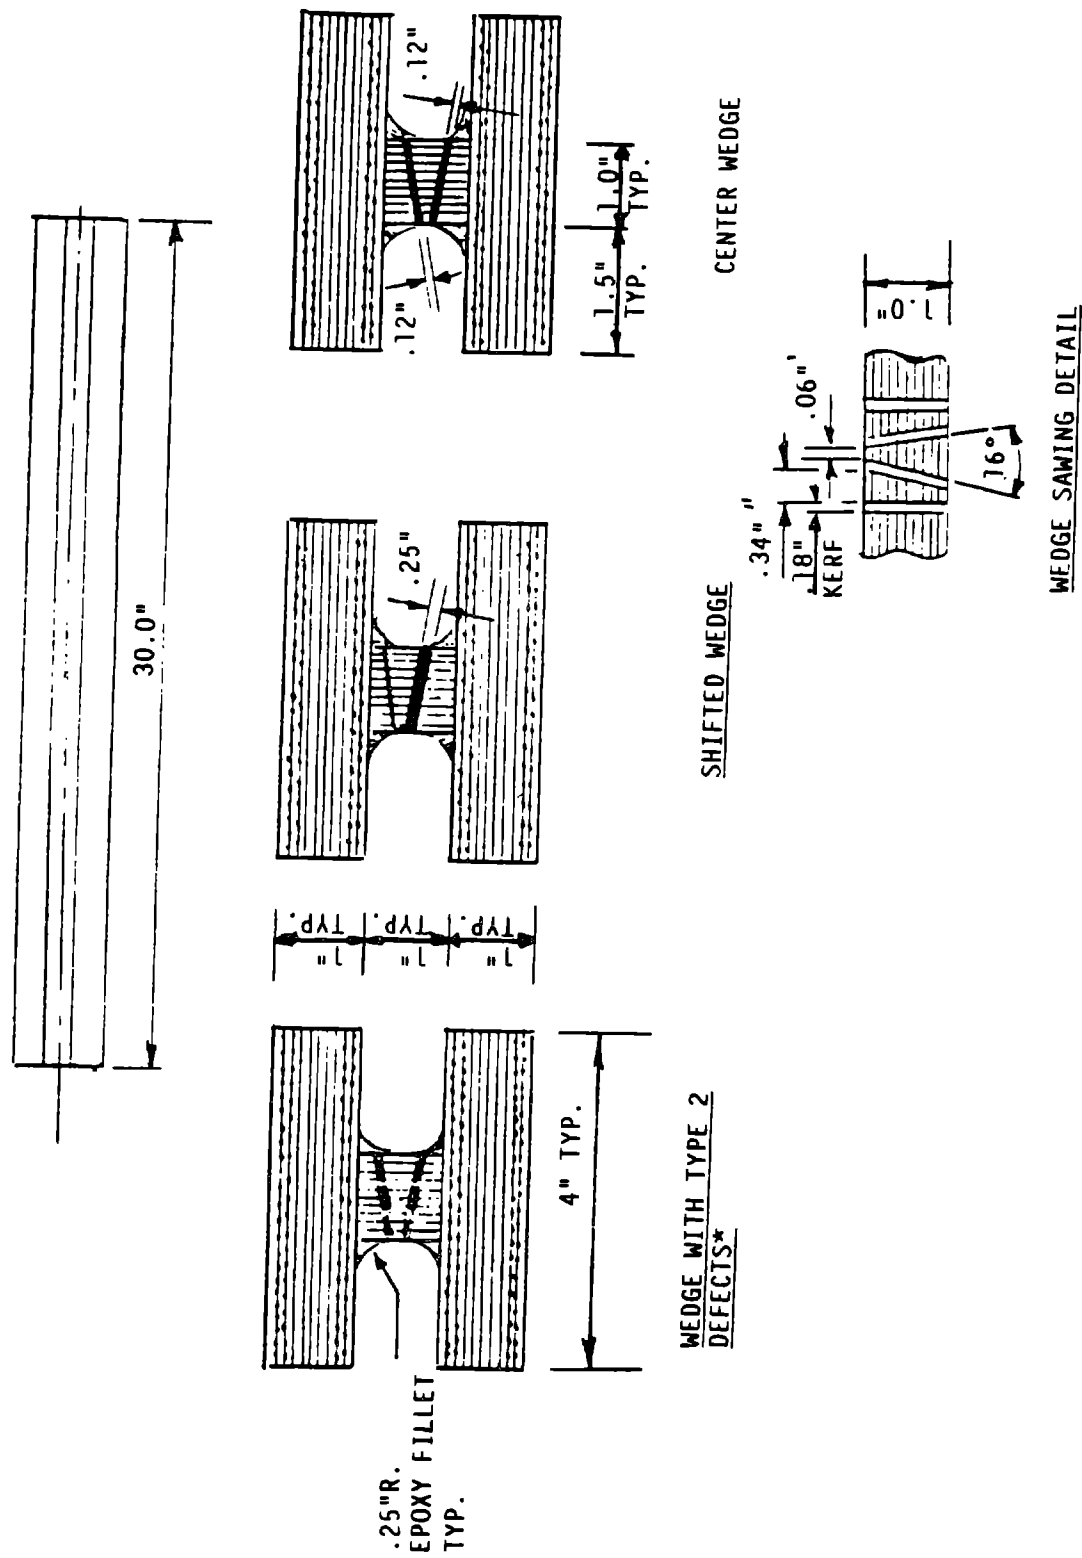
Specimen Fabrication - Longitudinal Wedge Joint Test
